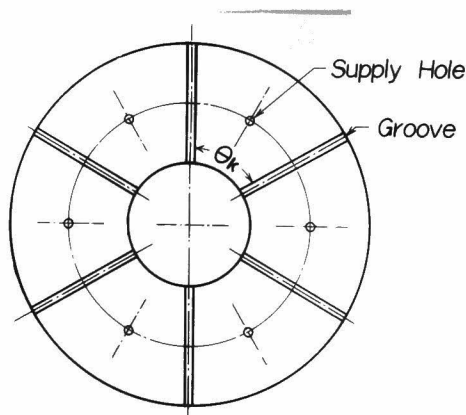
Thrust collar bearing with radial grooves between supply holes
